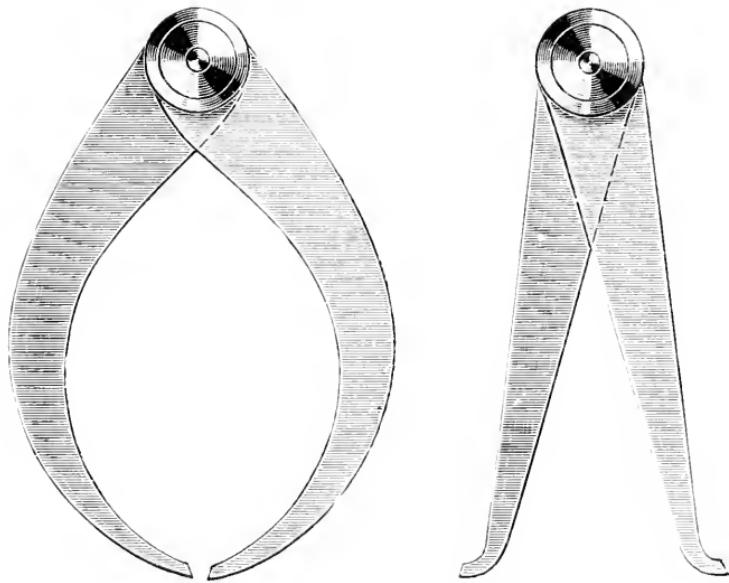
OUTSIDE AND INSIDE CALIPERS.
